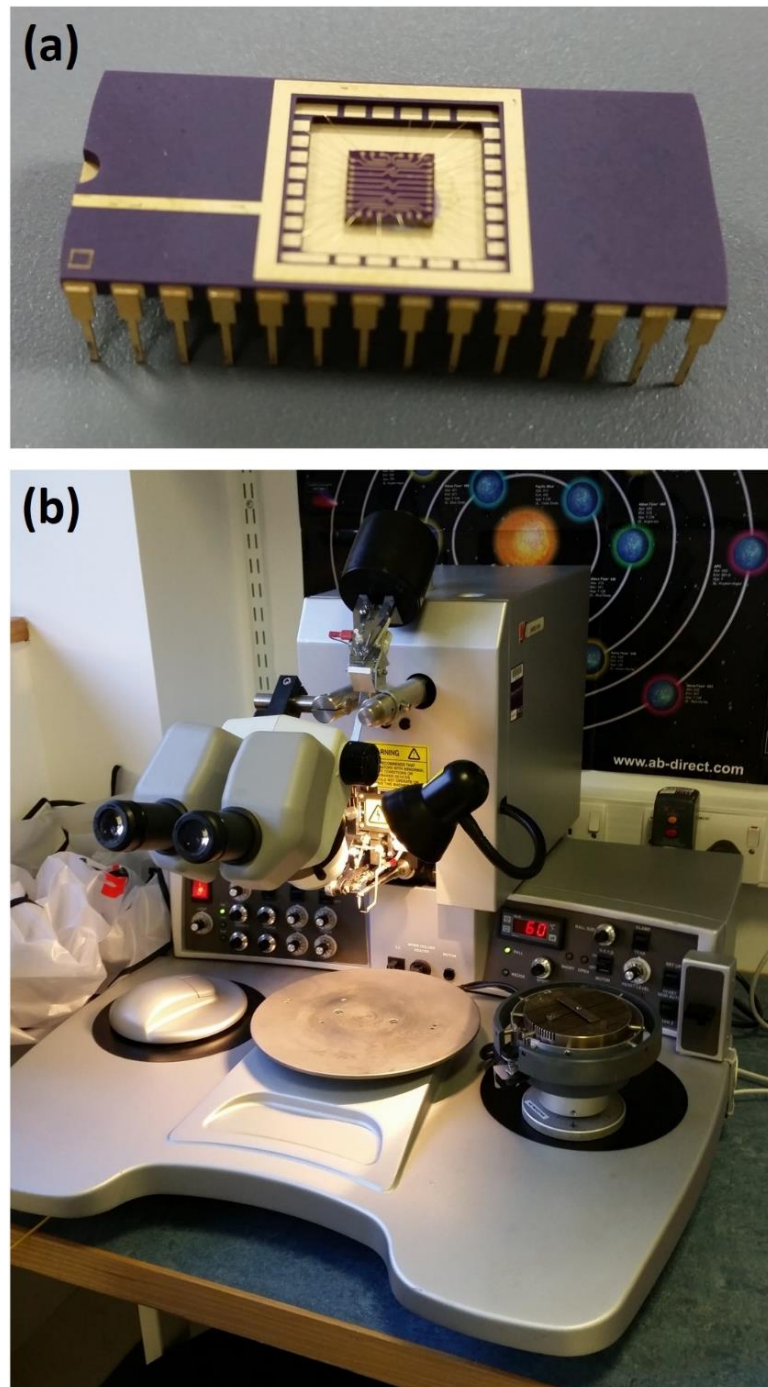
A fabricated die with several graphene Hall devices placed on a chip (a) and the wire bonder (Kulicke & Soffa Industries Model 4700 wire bonder) used for assembling devices to the chip (b).
